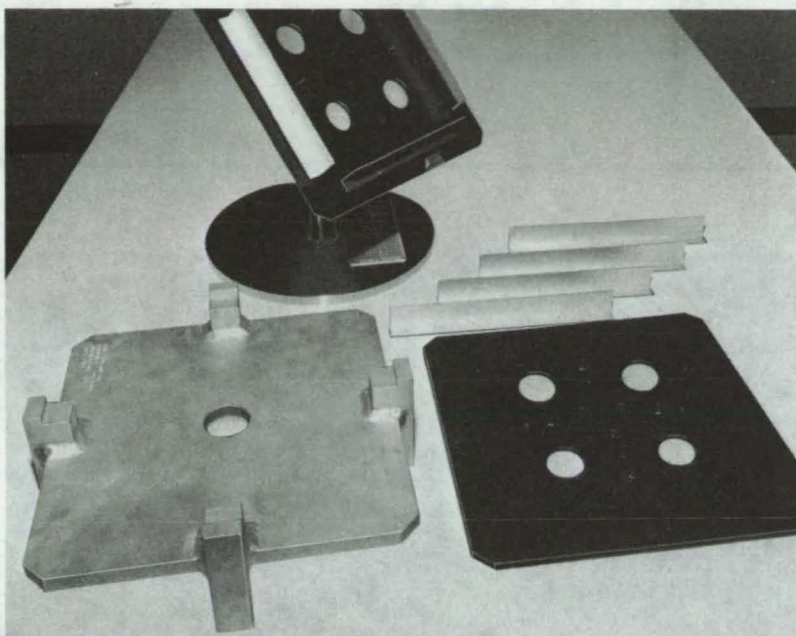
L-Shaped Masks are mounted on the turntable; an additional set is lined up beneath it, next to a plate that will carry the tiles to be sprayed. Special holding jigs like the one at lower left were also designed for the system.
